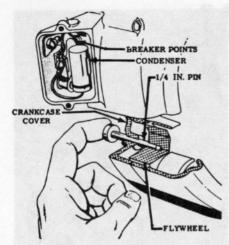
On MC-10 engines, crankshaft can be locked in firing position by inserting a ¼-inch (6.35 mm) pin into bored hole in flywheel.
